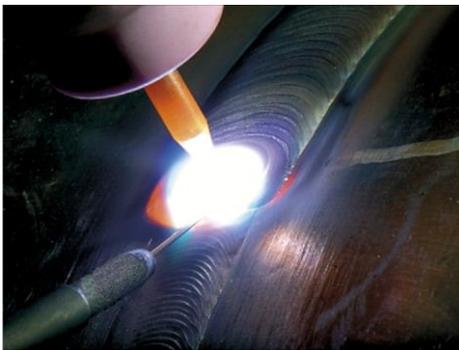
The shielding inert gas guarantees a perfect oxidation-free weld
